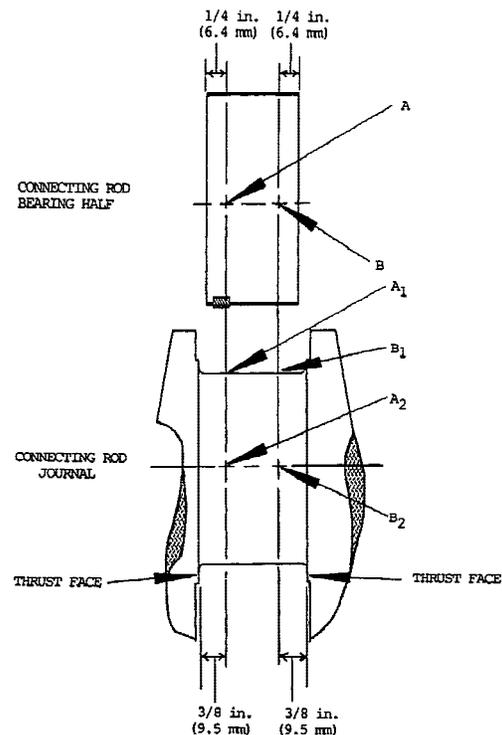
Clearance Measuring Points for Connecting Rod Bearings
